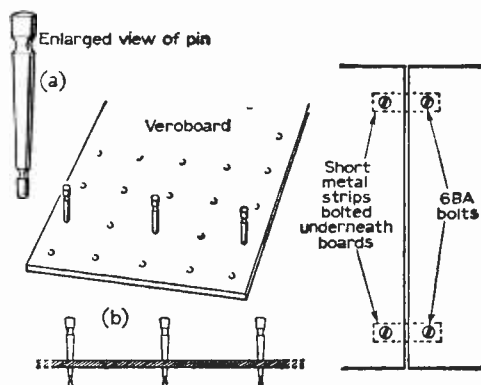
(left): The soldering pins made specifically to fix into *Veroboard*.
